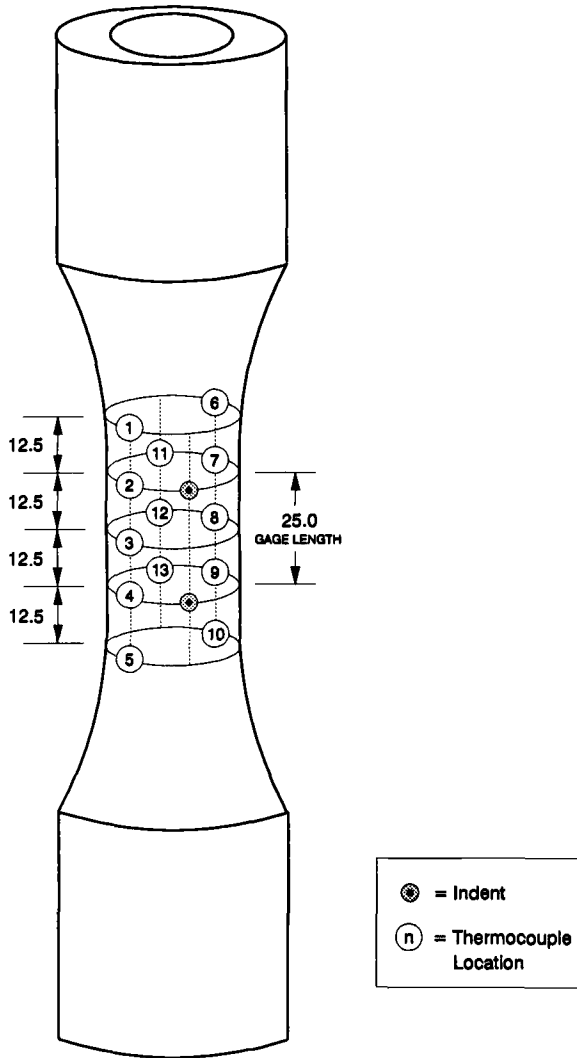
Extensometer indents and thermocouple locations on a torsional specimen (dimensions in mm).
